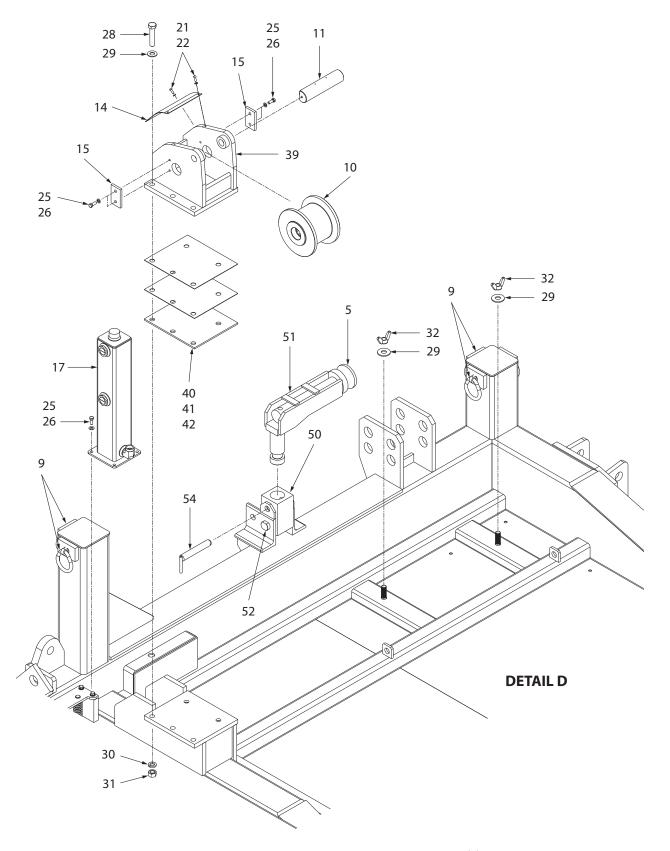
AGSE-E18401-S01 Base Assembly
